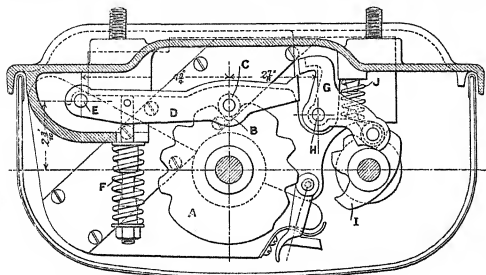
Section of Dick Kerr Controller near top shewing interlocking gear.
